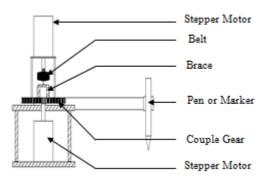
Position of Components 2-DOF Robot Manipulator Front View
